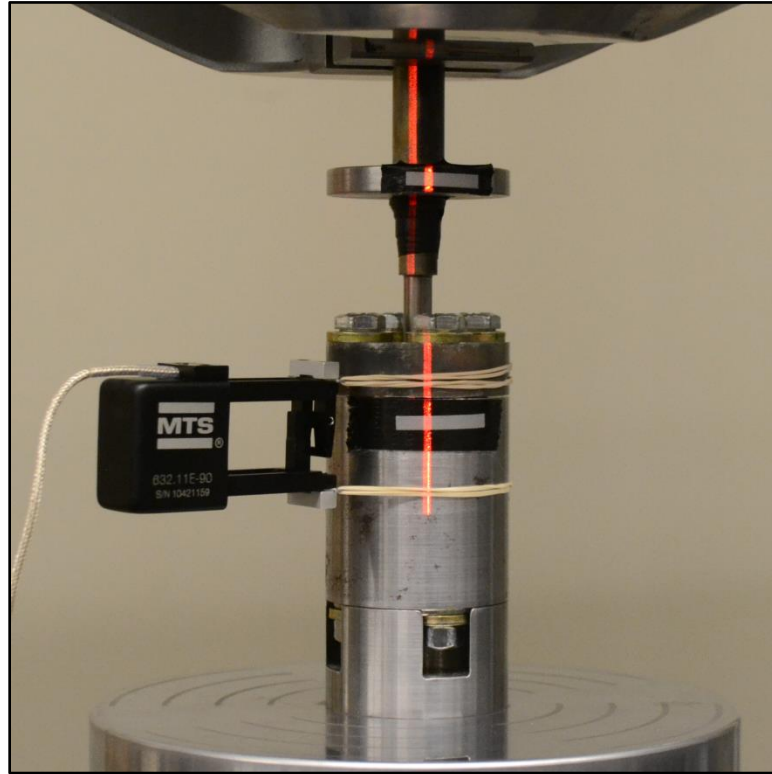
Assembled Punch Fixture Placed on Compression Platen and Punch Rod in Vee-Grips
